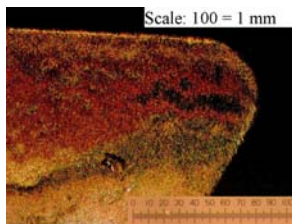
Picture showing top rake face wear for a dry cut after 7 minutes of machining at a cutting speed of 190 m min⁻¹, and feed rate of 0.23 mm/rev with a 2 mm depth of cut [7]
